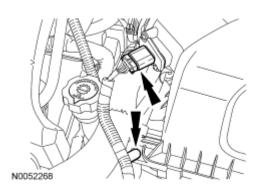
Locating LH VCT Solenoid Electrical Connector Courtesy of FORD MOTOR CO.
